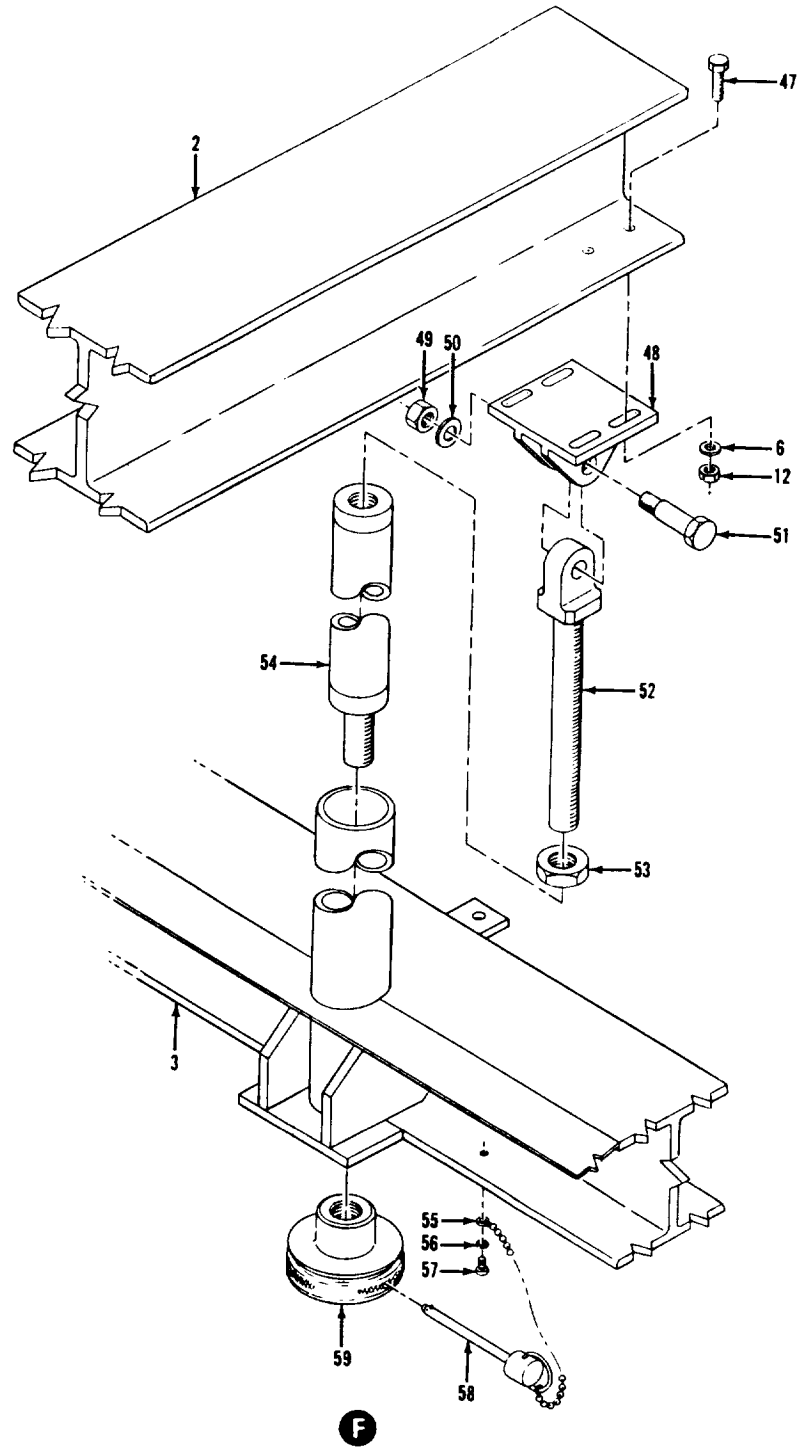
Extension Platform Assembly (Sheet 5 of 13)
